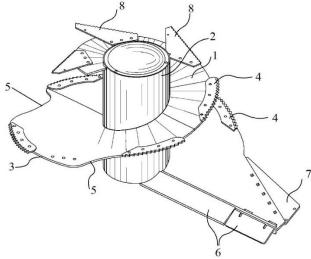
Auger design by «Penta Equipment» [12]: 1 – helical flight; 2 – vertical shaft; 3 – outer helical edge; 4, 8 – cutting blades; 5 – slots; 6 – scraper; 7 – guiding plate (kicker)
